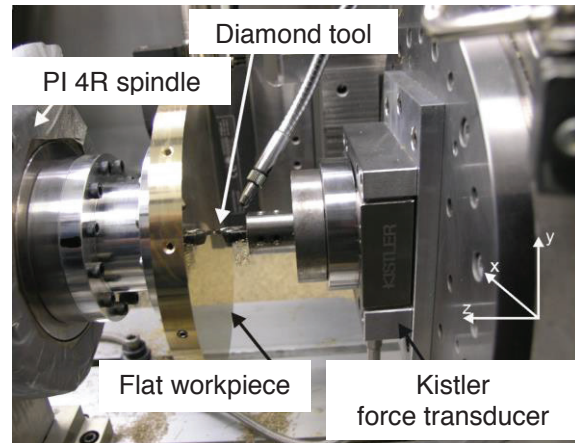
Face turning experiments with increasing cutting speed at constant material removal rate on a Nanotech 350 FG ultra-precision machine. Spindle speed: 9600 rpm. Workpiece diameter: 150 mm. Tool nose radius: 0.76 mm, 0° rake, 6° clearance.
